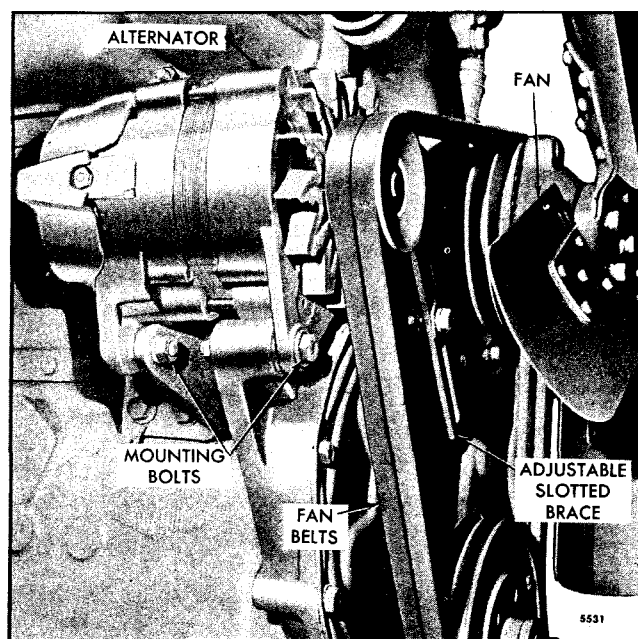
Typical Fan Belt Mounting (220 and 330 Engines)
